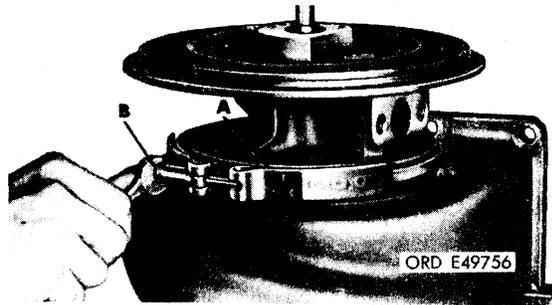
SECURING BEARING HOUSING ON TURBINE HOUSING - TURBOCHARGERS 10912638 AND 53591-C-139552.
